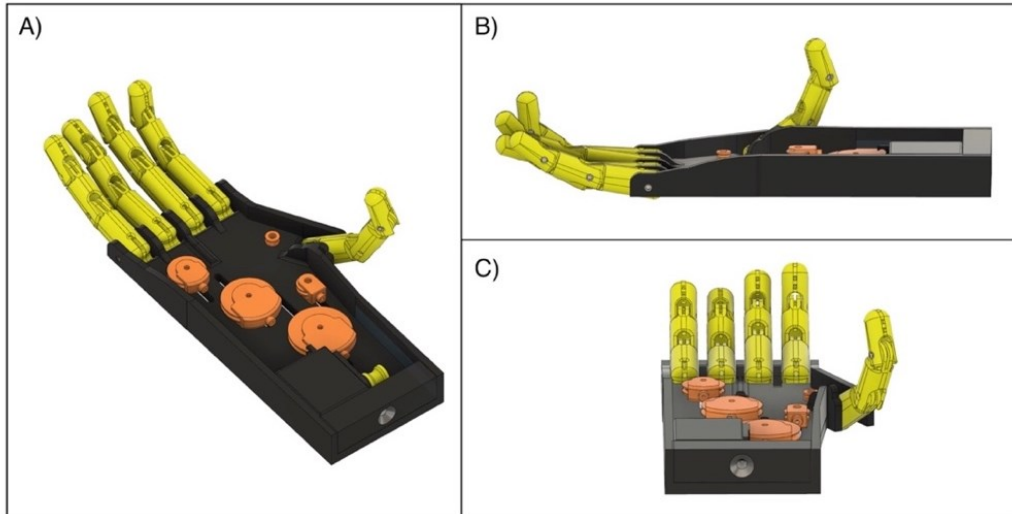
3D renderings of the “Federica” hand with built-in servomotor: a) Top view; b) Side view; c) Bottom view.
